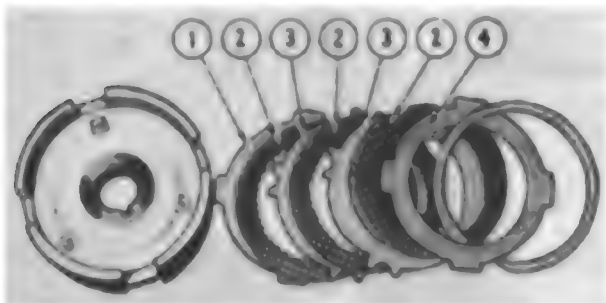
View showing components removed from direct drive side of TA clutch.
